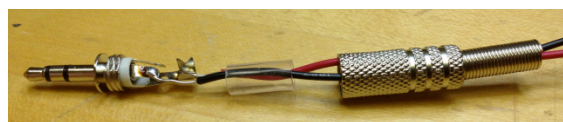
Electrical wires are shown soldered to a disassembled 3.5 mm metal plug.
